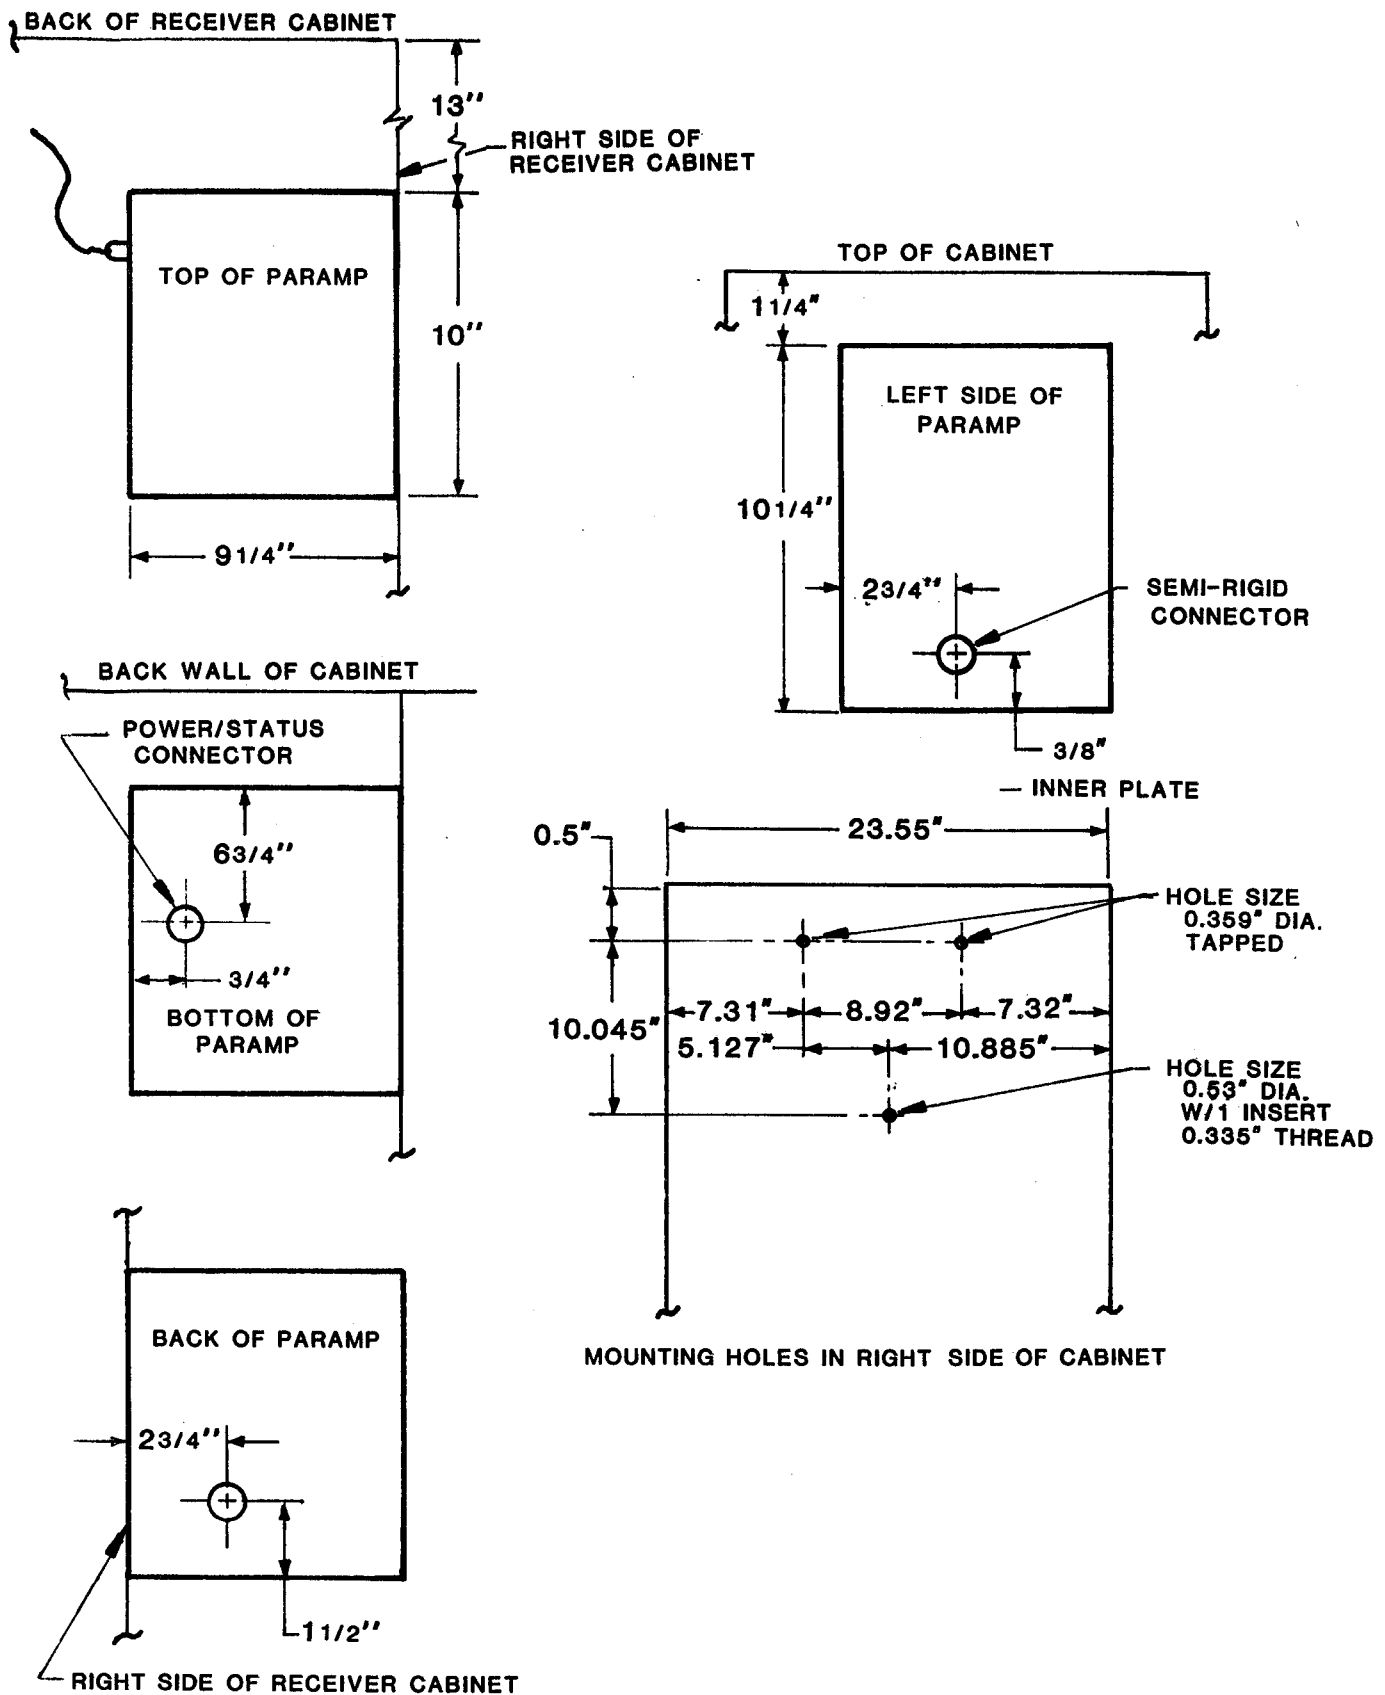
ASR-8 PARAMETRIC AMPLIFIER ASSEMBLY DIMENSIONS.
